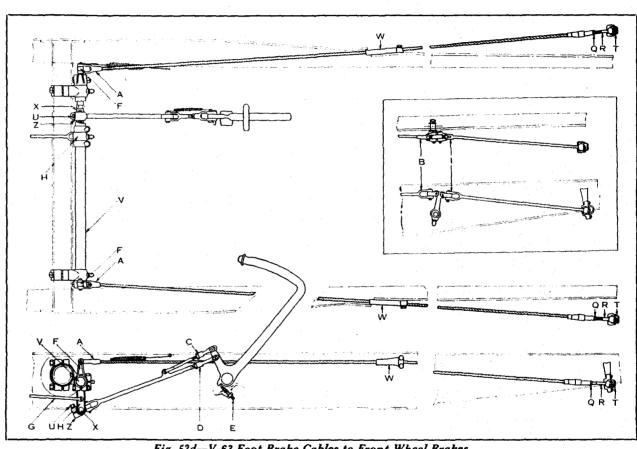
V-63 Foot Brake Cables to Front Wheel Brakes (First Type. Inset shows rods used on early V-63 cars)
